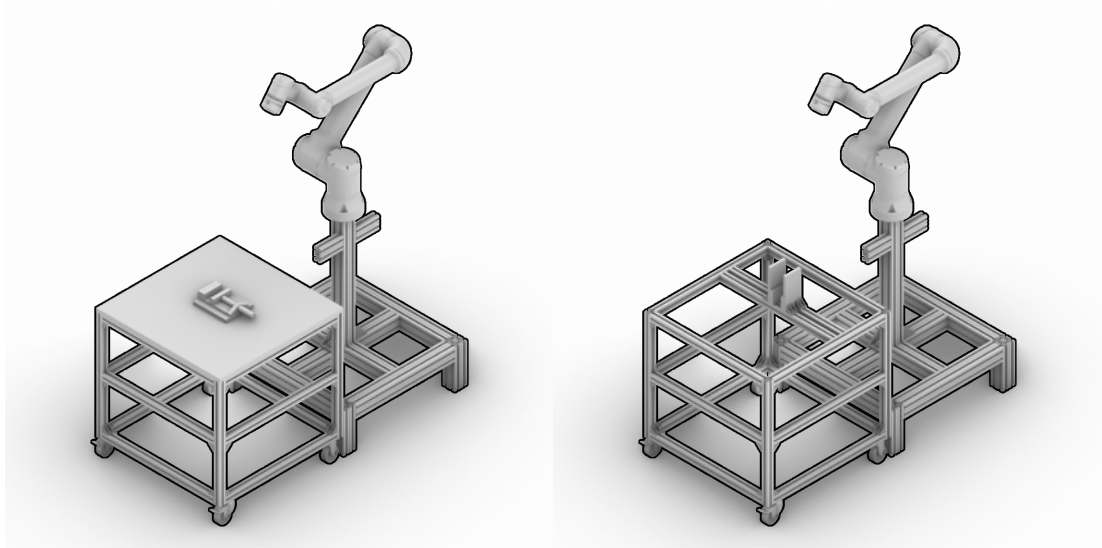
Robotic setup variations. Left: Machine-vise. Right: Custom fixture.
